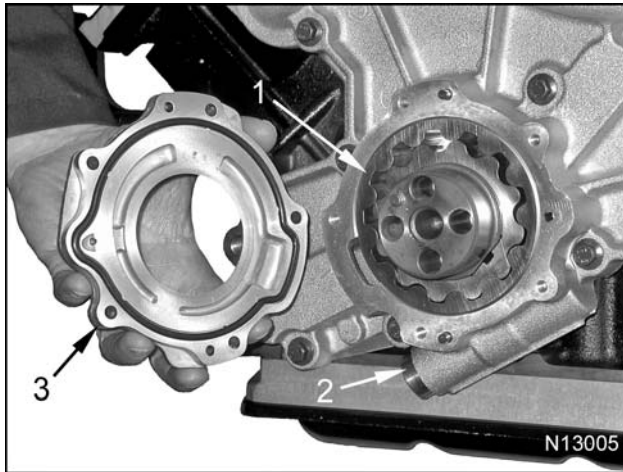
Oil pump, gerotor cover and oil pressure regulator
